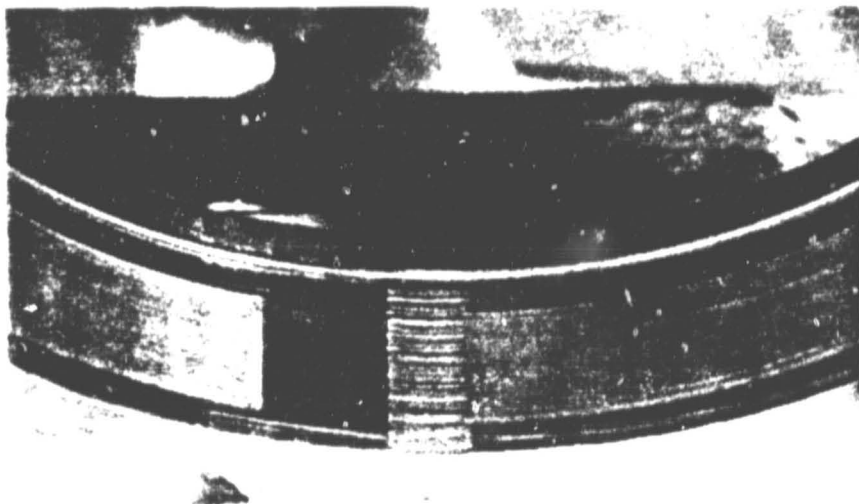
Undamaged Seal; Inboard Ring - Seal Set No. 1
